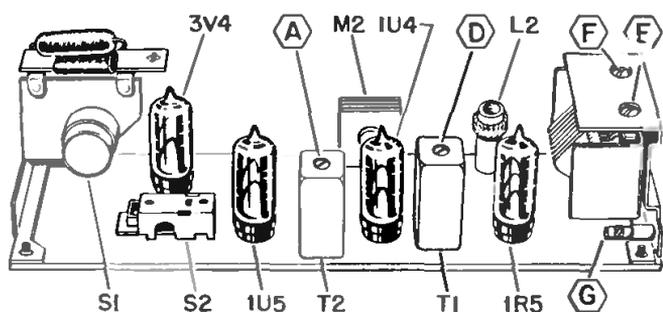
Top View of Chassis 200. Tube Locations and Alignment Points Shown.
